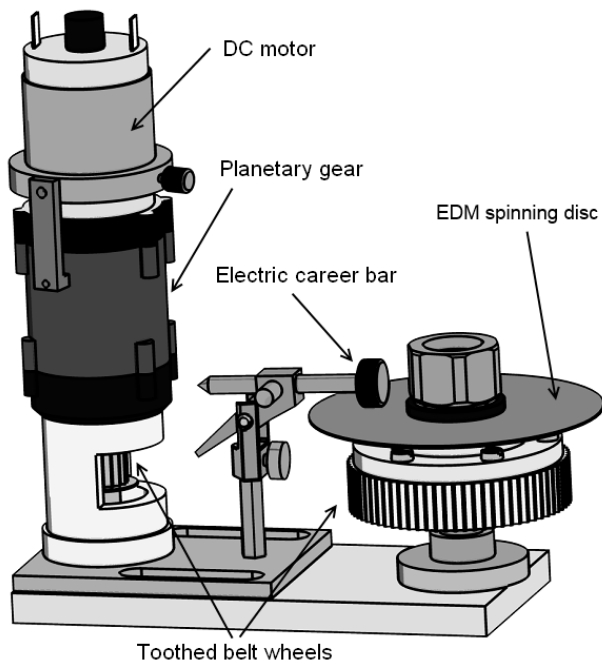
Diagram of complete design of the EDM spinning disc tool system.
